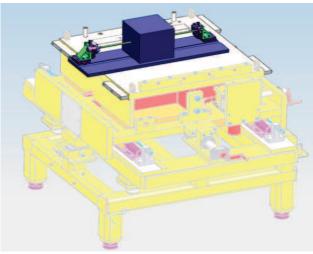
Complete setup for supporting and driving the rotating shaft with coils.
